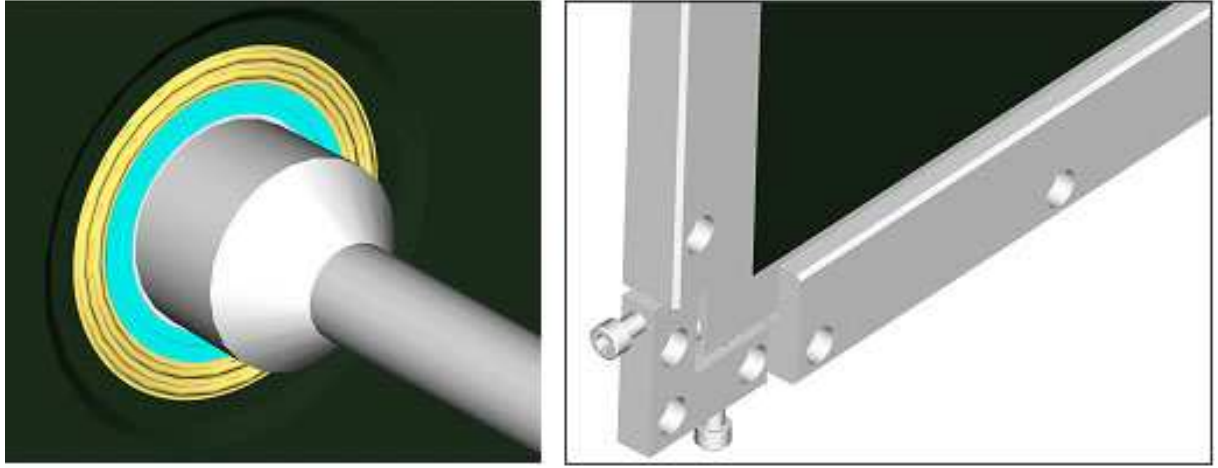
(a) Flexible Kapton seal to the beam pipe, (b) Clamping and adjustment detail.
